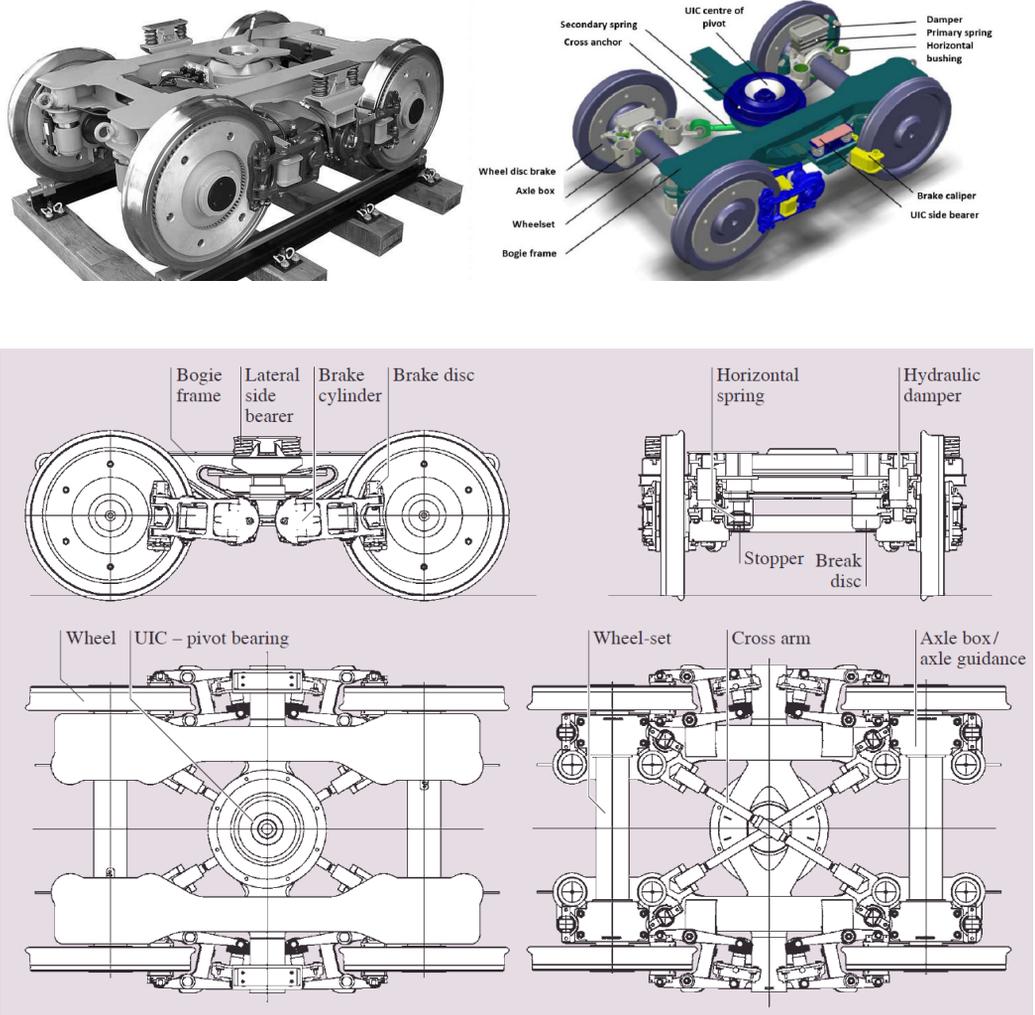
The Leila bogie, with inboard bearings wheelsets, web-mounted disc brakes, Gigabox primary suspension, two levels of suspension and cross-bracing (lower figure from Grote Antonsson - Springer Handbook of Mechanical Engineering, ch. 13.3 Railway Systems – Railway Engineering)
